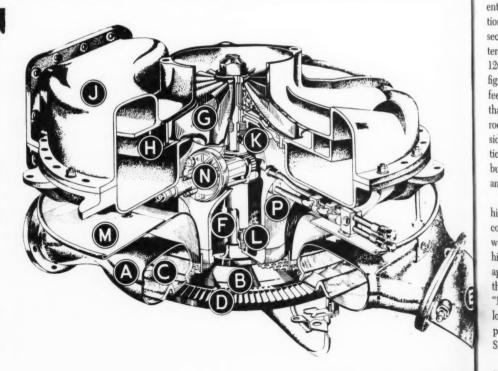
Cutaway view of turbosupercharger unit shows turbine element below, compressor element above
